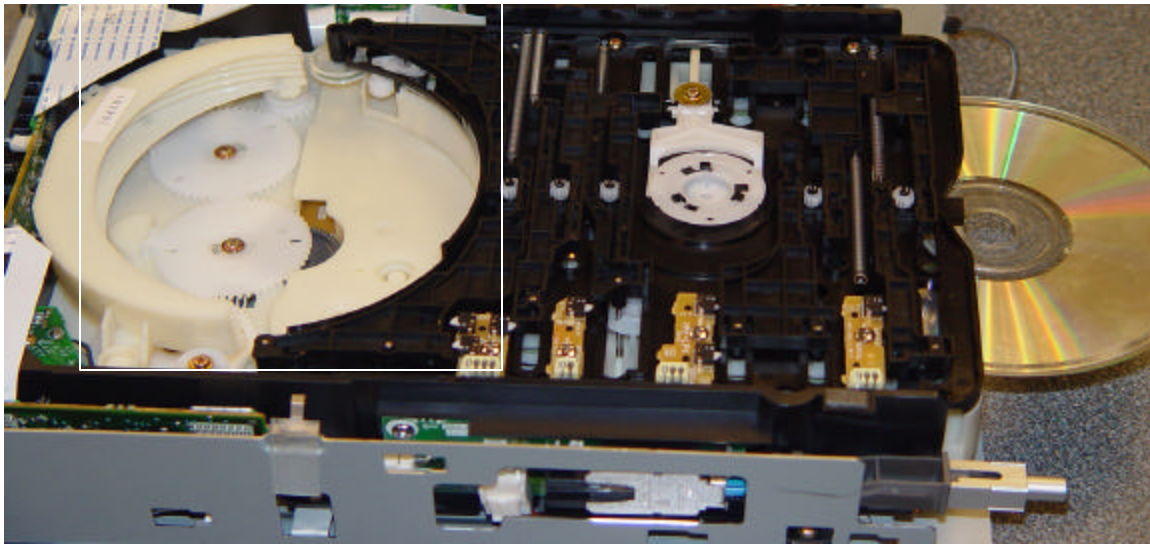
STACKER GEAR ALIGNMENT AREA
